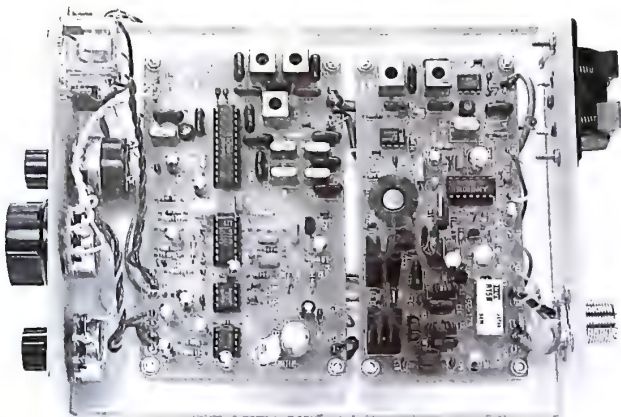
Inside view of the A & E Engineering transceiver. Unit is available in kit form and is relatively easy to assemble. Photo courtesy of A & E Engineering.
